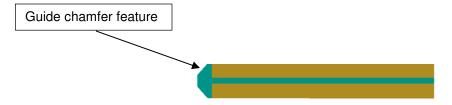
Recommended guide chamfer feature (2.0*1.0mm) view of Laminated Mating Bus Bar Board.
